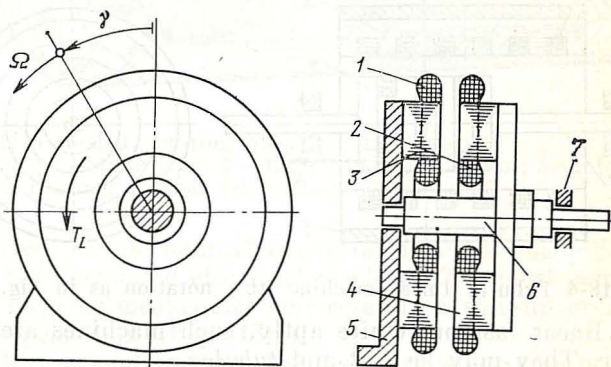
Rotating disc-type machine (the notation is the same as in Fig. 18-1)
